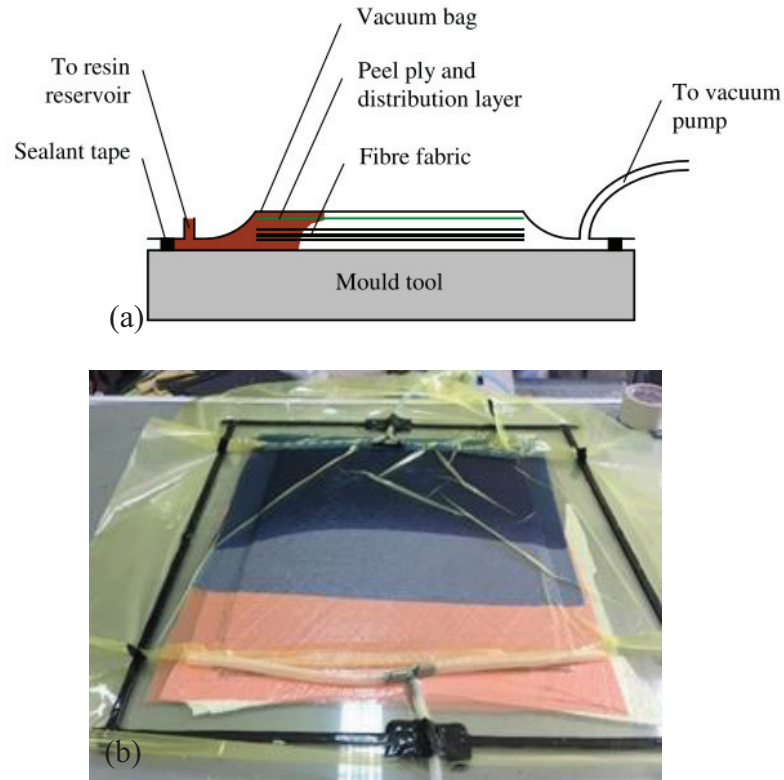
(a) A schematic representation of vacuum-assisted resin transfer molding technique (Source: Dong 2008) and (b) The set-up used in the manufacturing of hybrid laminates
